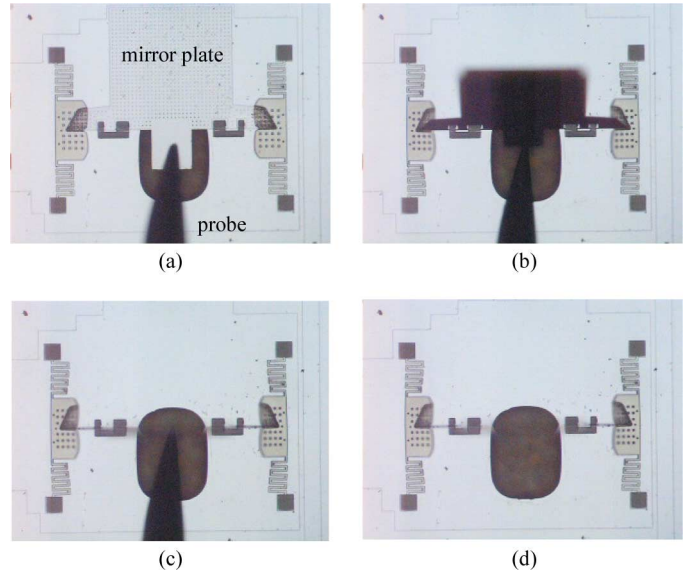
Assembly of a fabricated micromirror. (a) Initial flat position. (b) Intermediate position. (c) Upright position. (d) Probe removed.
